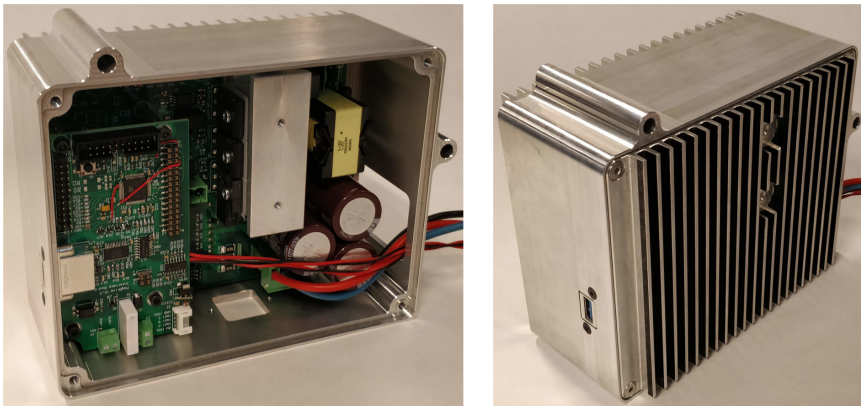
Both PCBs mounted in the inverter enclosure. The control PCB is clicked onto the power PCB..
